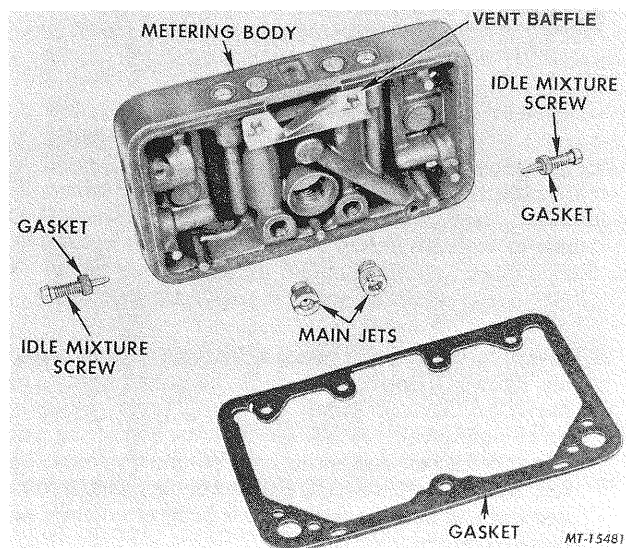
Primary Metering Body, Fuel Bowl Side (Disassembled View)
